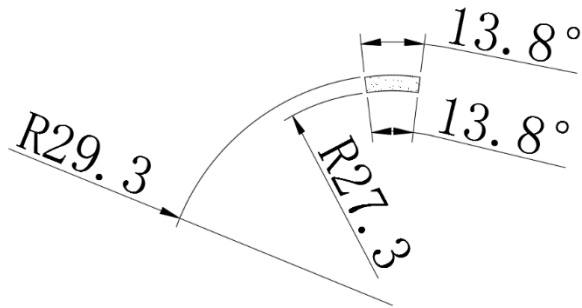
PM dimensions for 6-stator-slot SPM-FRPM machines.
